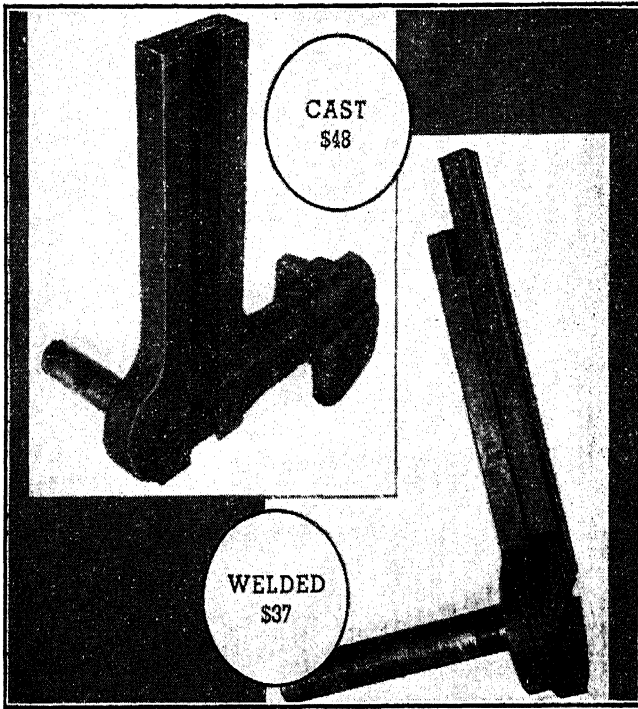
Bending arm and ratchet control for a bar bending machine. The cast iron part cost \$48, weighs 225 lbs., and occasionally broke. The welded steel design costs \$37, weighs 185 lbs., and is unbreakable.
